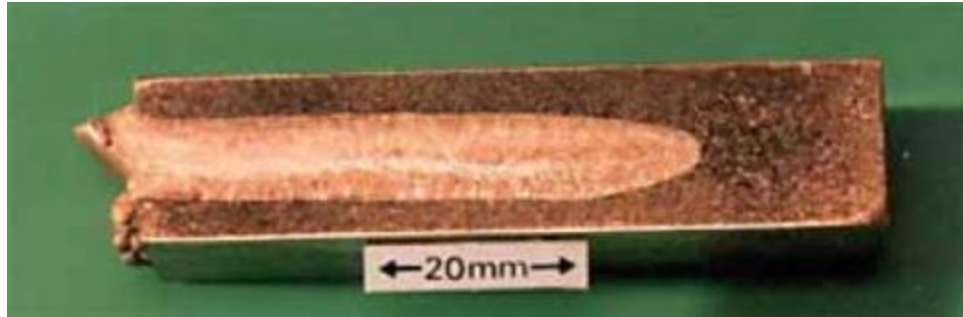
Reduced pressure EBW in copper showing round-bottomed weld profile (Nightingale, 2004)
